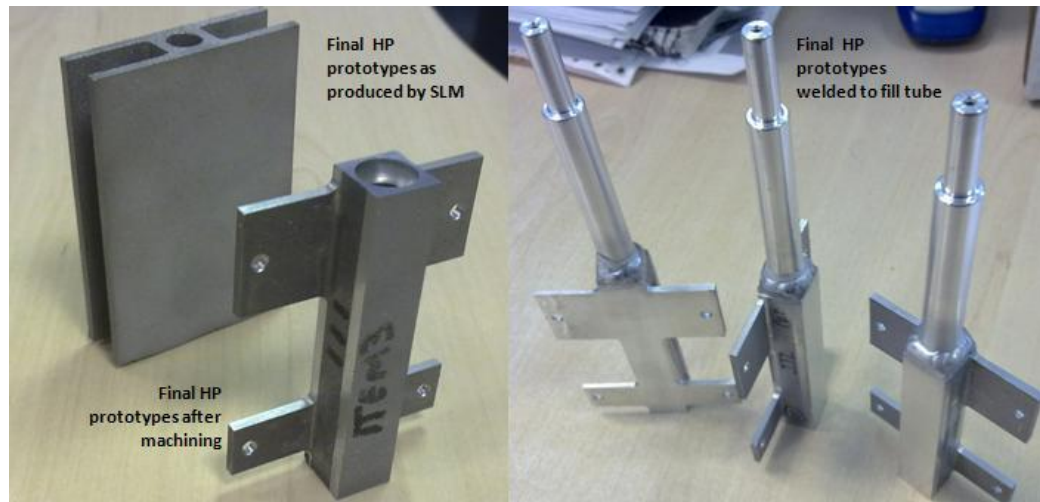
9 Final SLM HP prototypes with annular sinter-style wick
